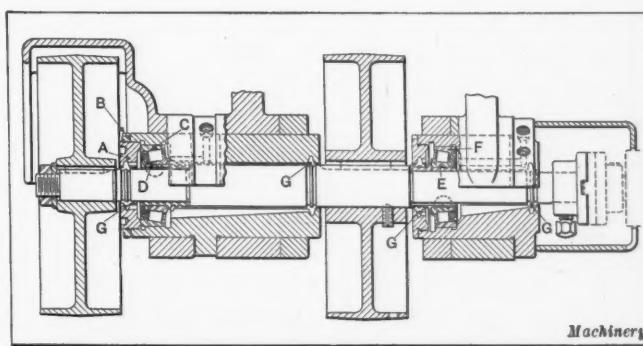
On High-speed Machinery all Bearings must fit Tight to avoid Vibration. This Grinding Machine Driving Shaft is carried in Tapered Roller Bearings having Means for taking up Lost Motion
